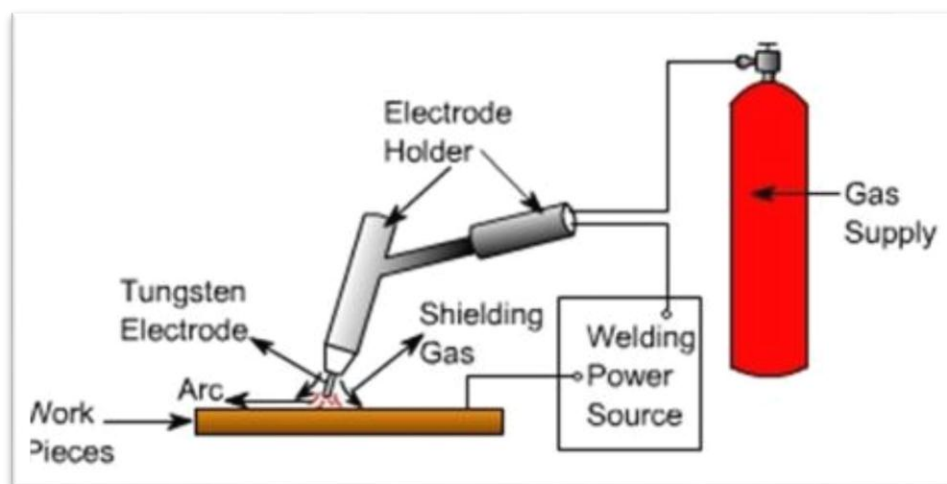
Schematic Diagram of TIG Welding System.
